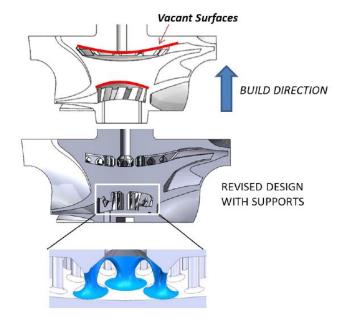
Build direction and internal supporting structures introduced within hollow cooling passage [2]
